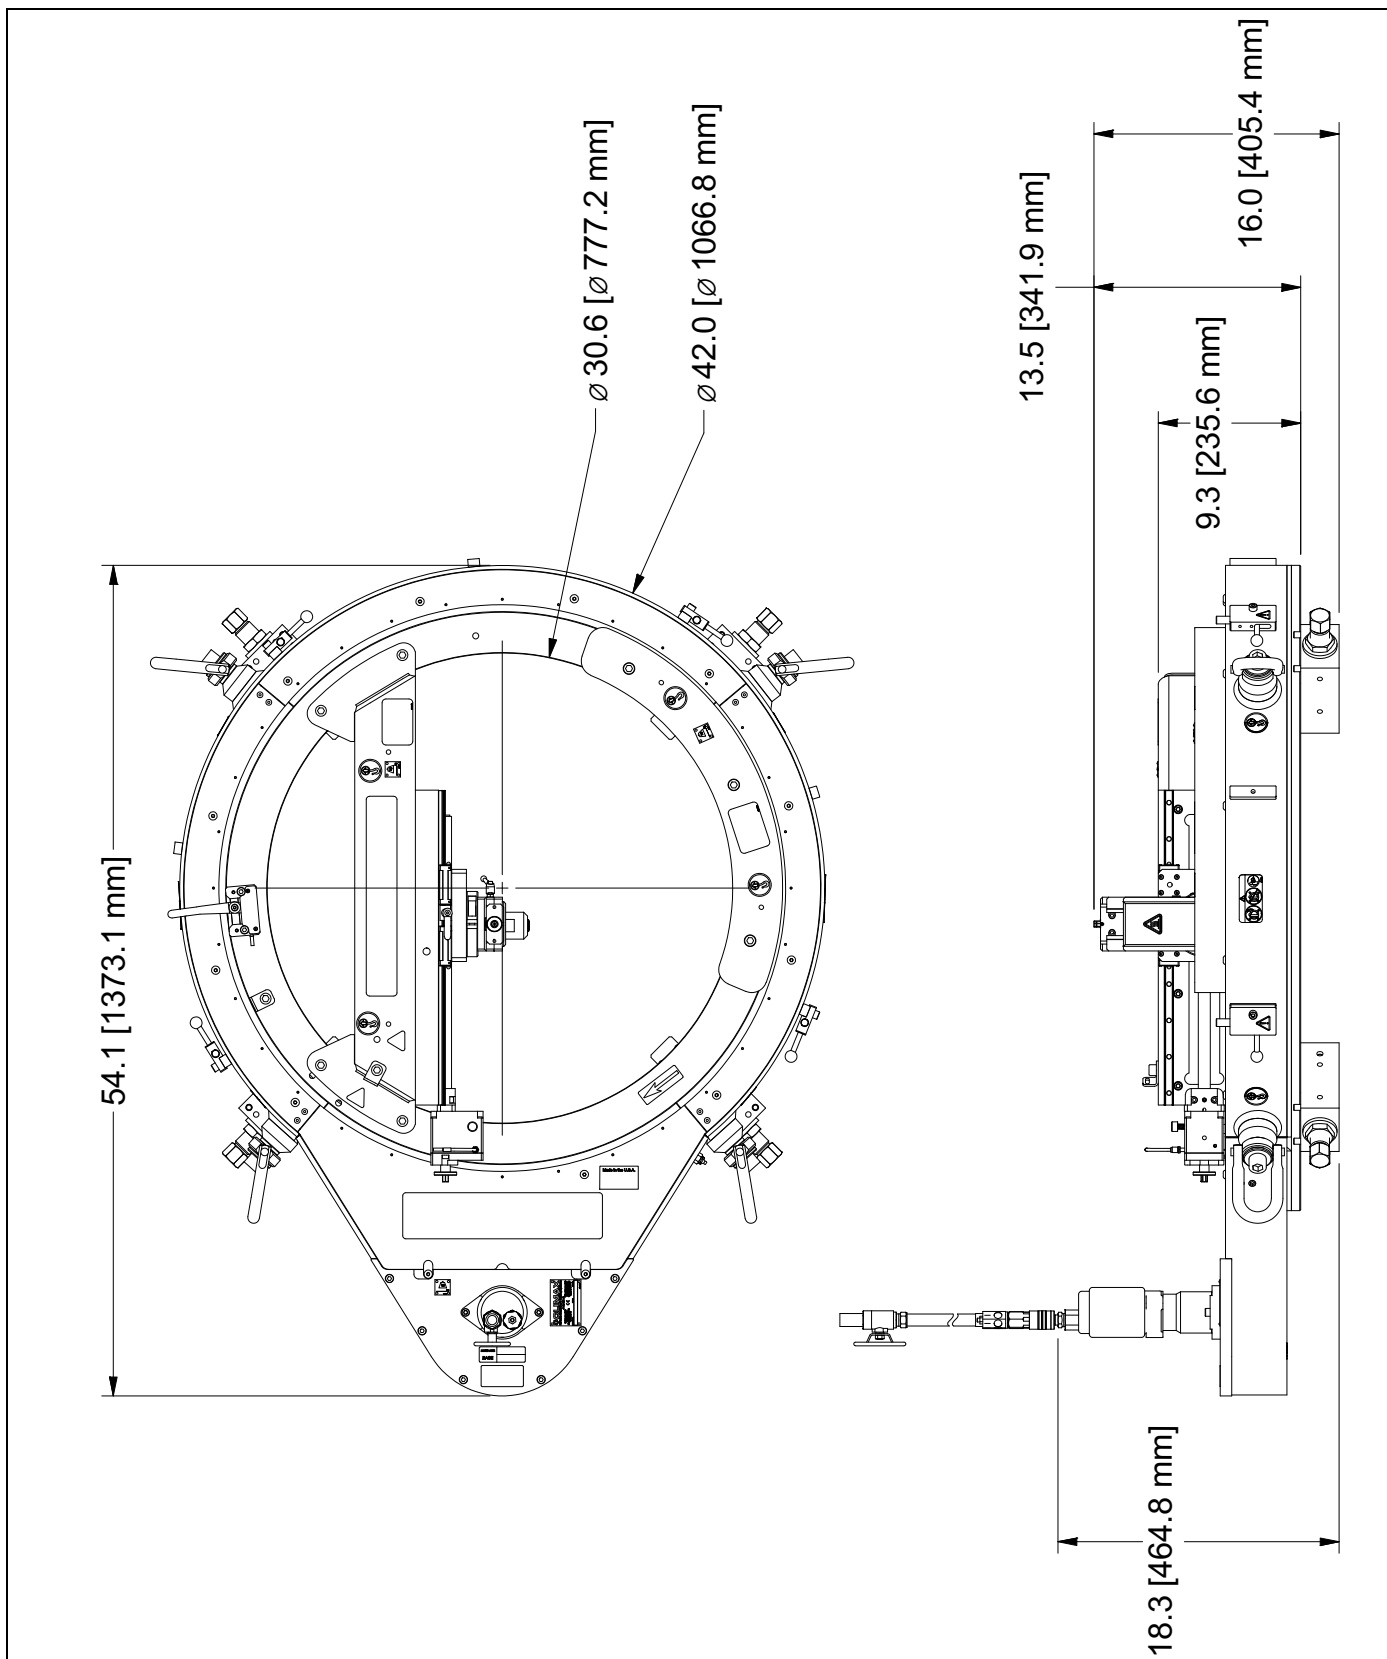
ODF30 SPEED FACER DIMENSIONS (P/N 88930)
